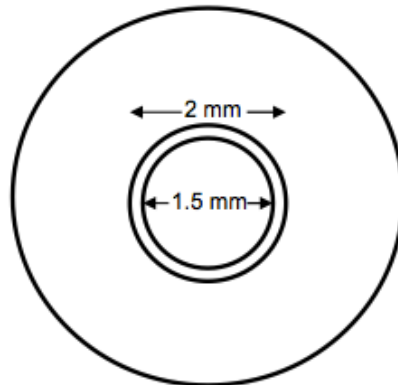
Schematic of the full-contour Y-TZP ceramic slider machined using a CAD/CAM milling unit following the predetermined geometrical dimensions (Top view).
